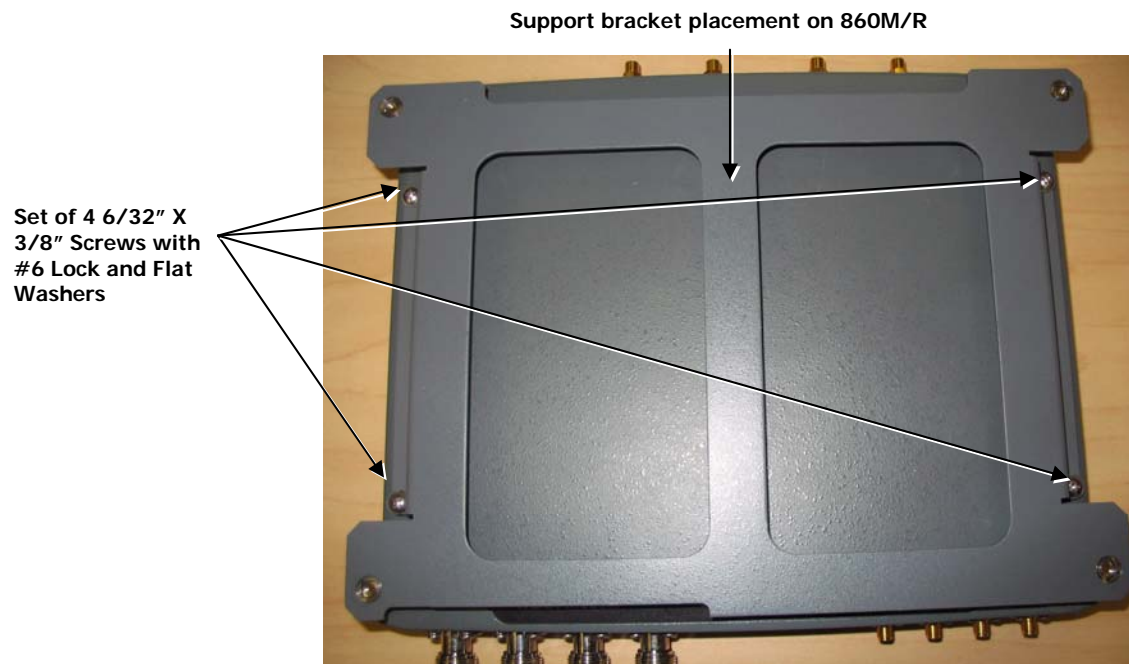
BRKT-RHU-800-STK Placement on 860M/R
